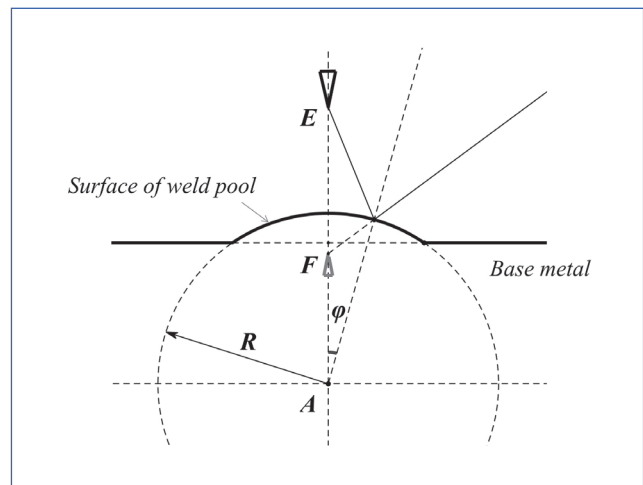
Imaging model of weld pool spherical surface.
